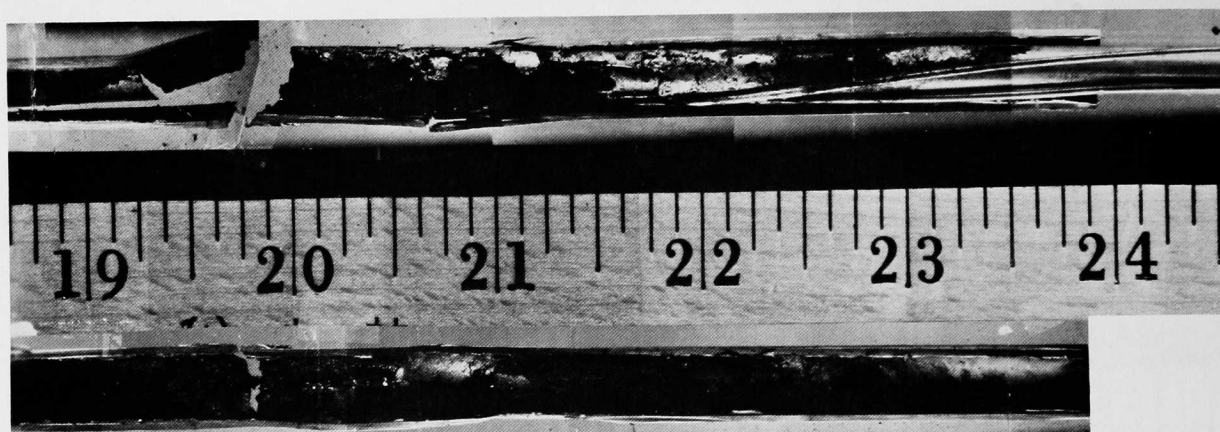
Inside Surfaces of Inner Wall, 19-24 in. from Bottom End Plug. Neg. No. MSD-168138.
